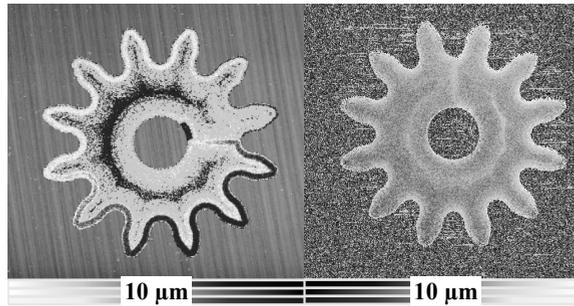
Mould for a gearwheel before (left) and after the reconditioning process (right)
